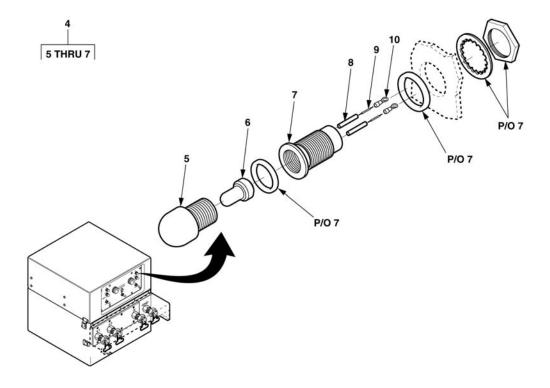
Lights/Lamps Assembly, 97403 13229E5764-2
